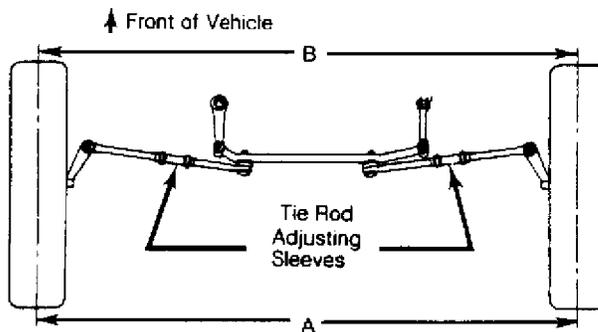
²⁶⁶⁹⁴ Checking Steering Linkage
